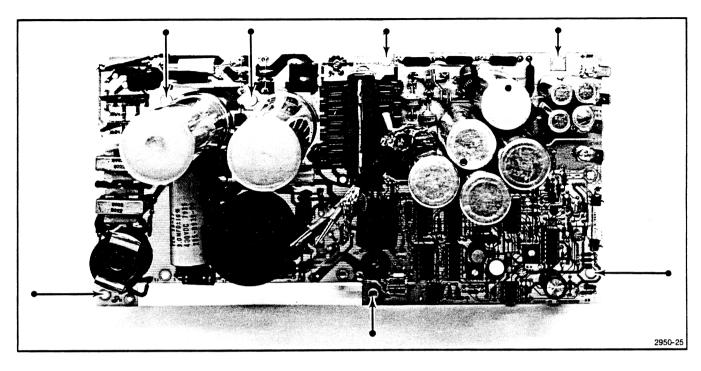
Location of screws holding the dc power supply circuit board to the mainframe chassis.
